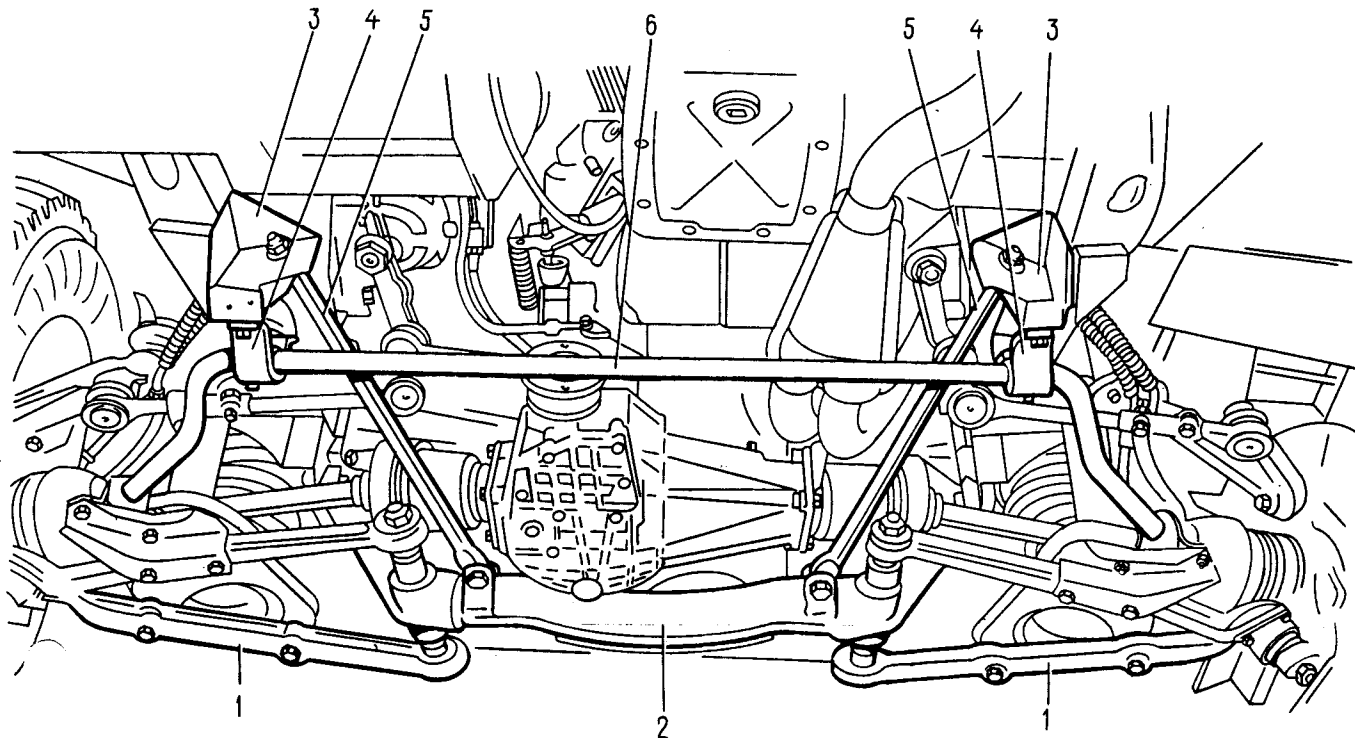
Front Suspension Mounted on Car. Rear View:
